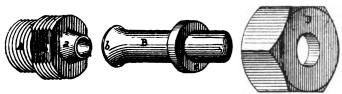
THE NEW IGNITION TUBE FOR BOLLÉE VOITURETTES.
